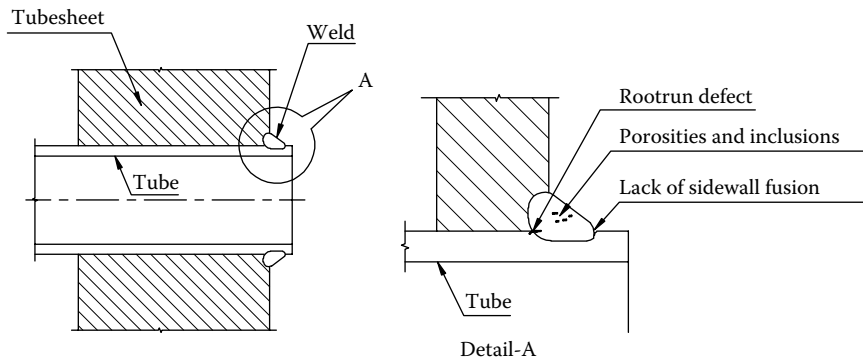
UT inspection of tube-to-tubesheet joint welds.
